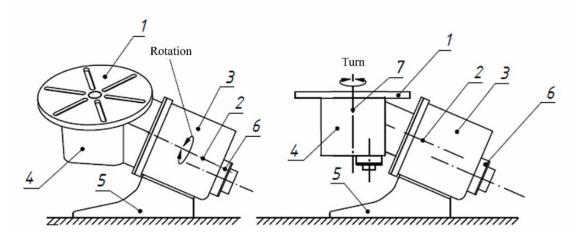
Variant of the Universal rotary welding device layout
